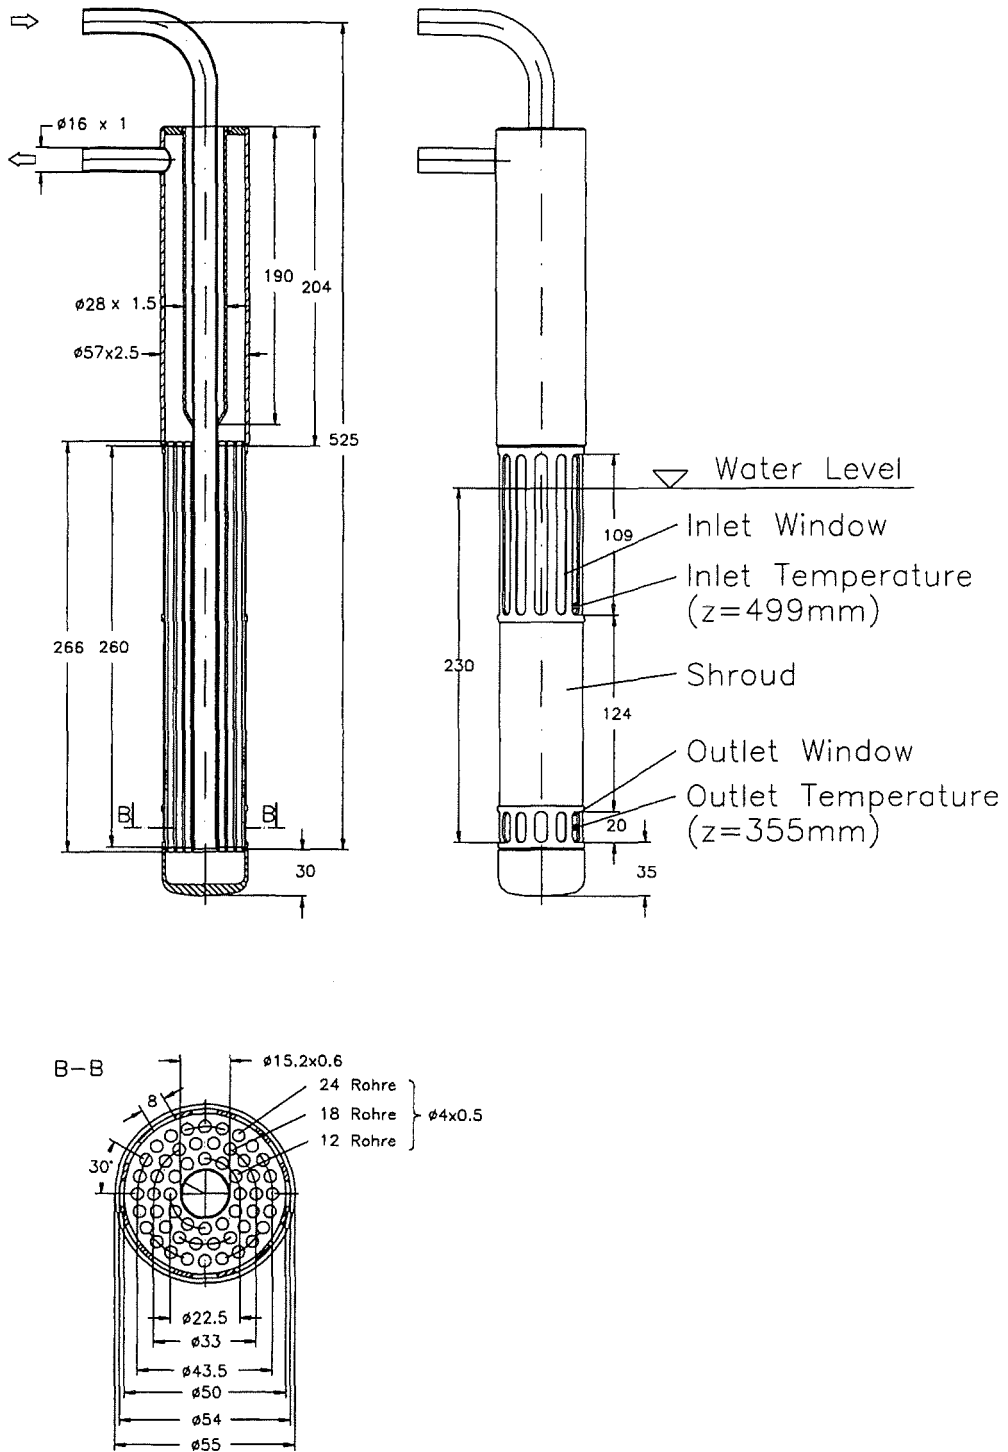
Cross-sections of the decay heat exchanger (dimensions in millimeters)
